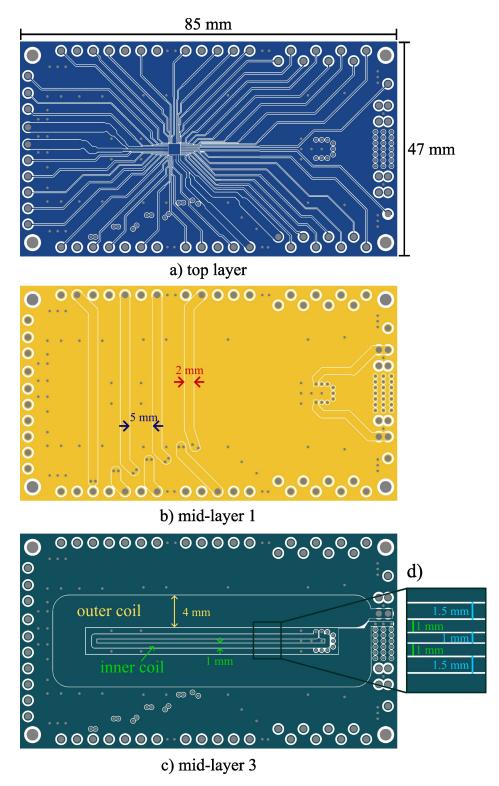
Shown are the labelled CAD layouts for three out of the twelve PCB layers.
